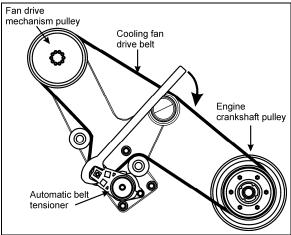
DRIVE BELT ROUTING (VOLVO D13 ENGINE)
